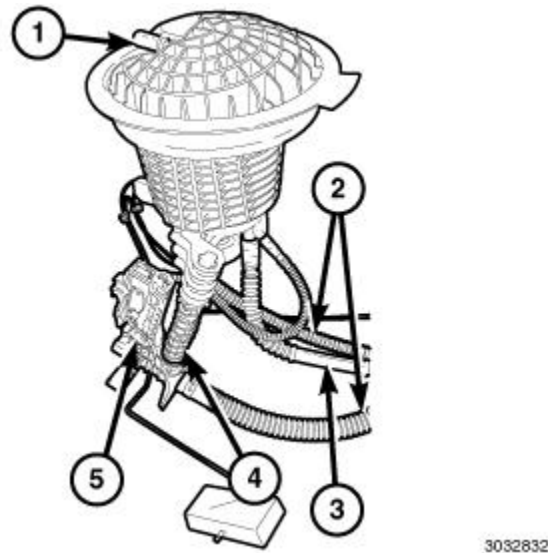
Fuel Supply Fitting, Fuel Return Lines, Fuel Supply Line, Fuel Pressure Regulator And Fuel Level Sending Card
